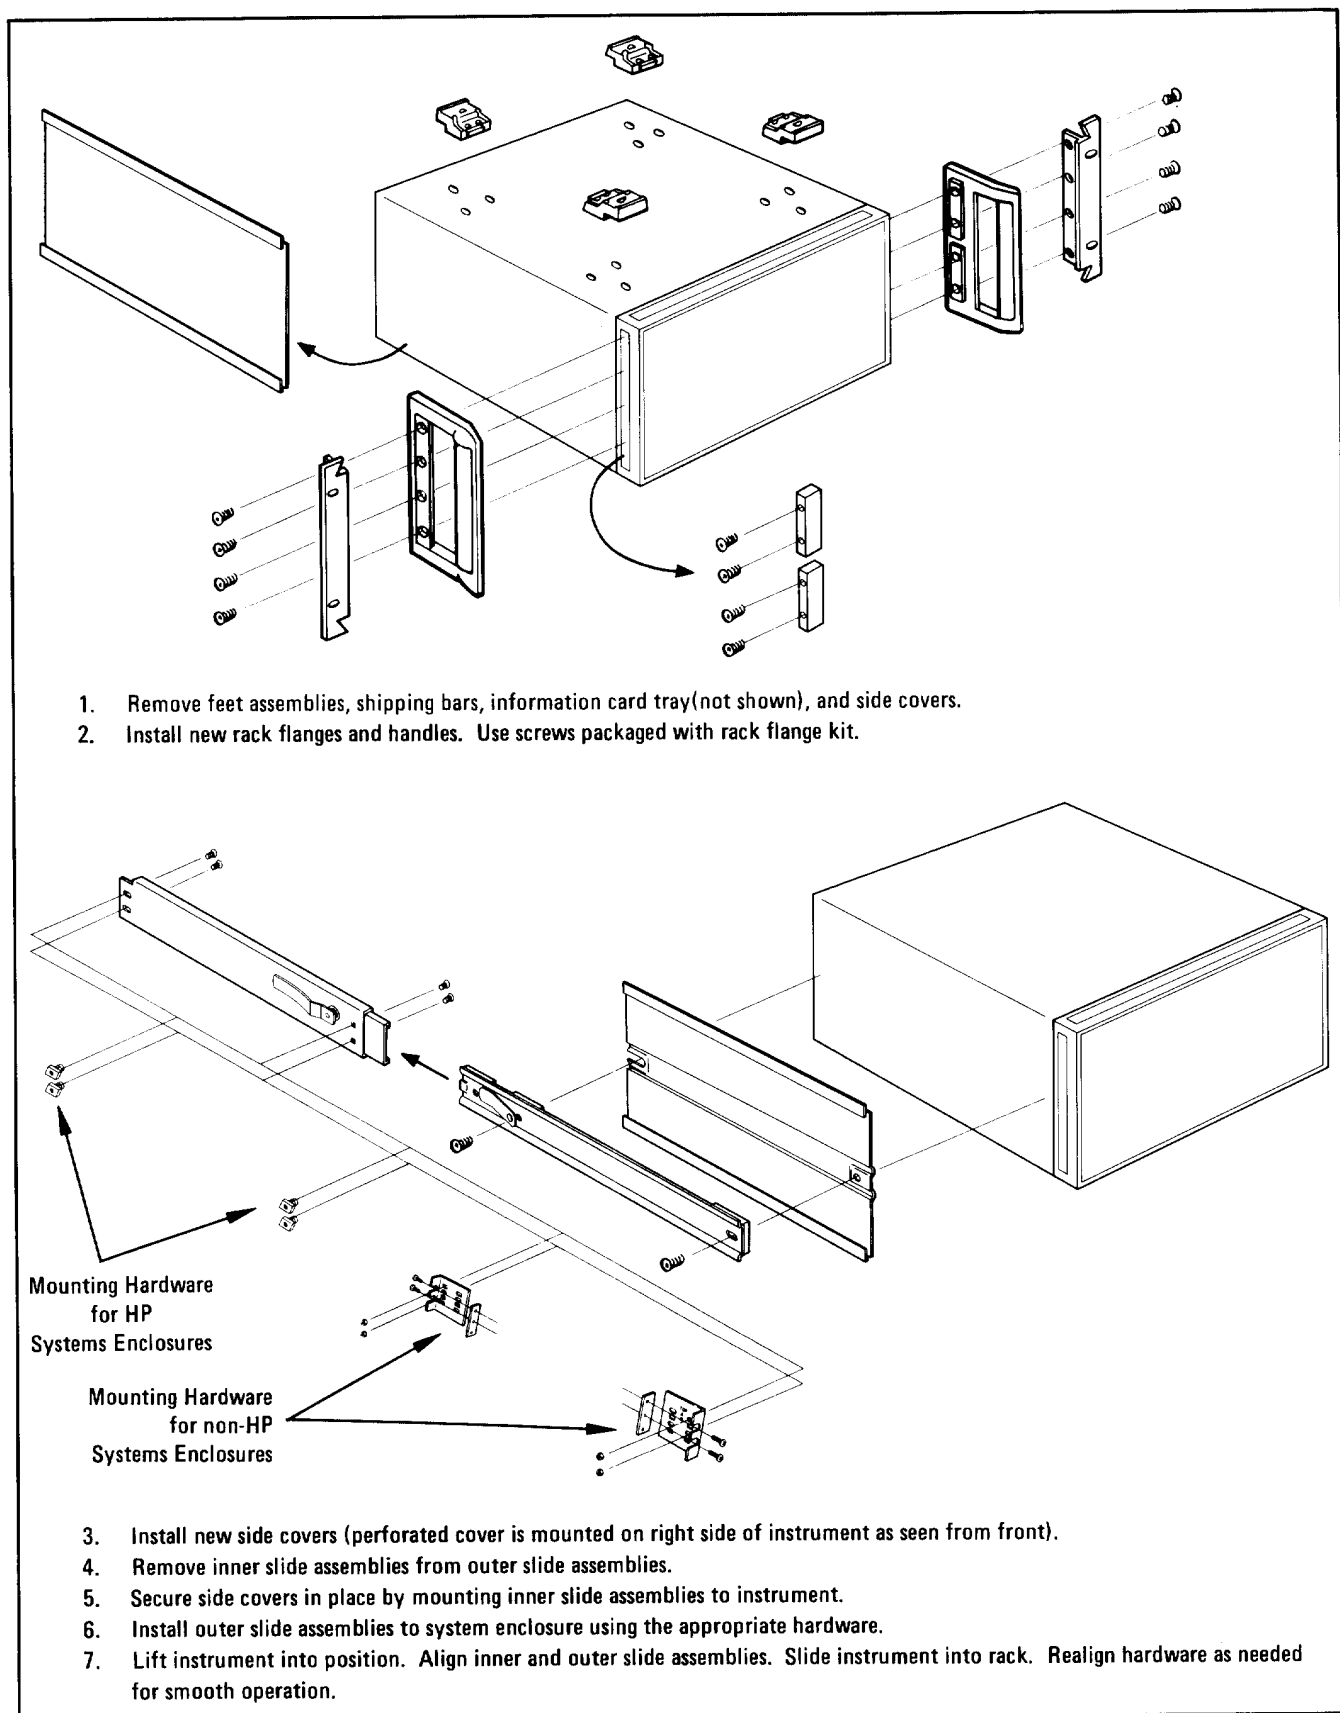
Chassis Slide Kit Mounting Instructions (Option 806) (1 of 2)
